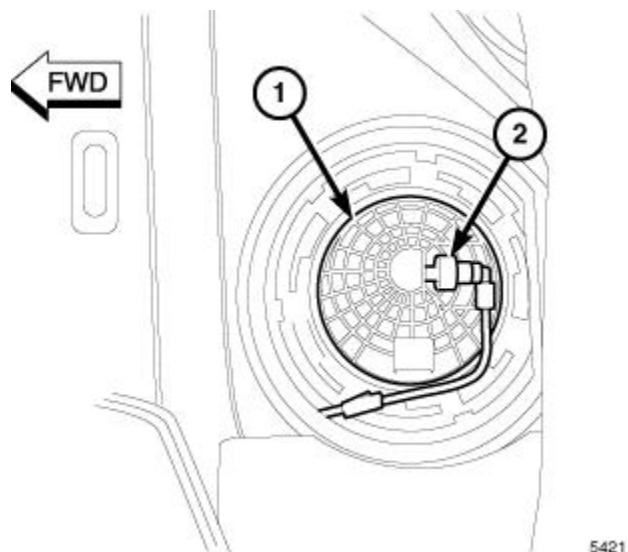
Auxiliary Fuel Pump Module & Fuel Supply Line
